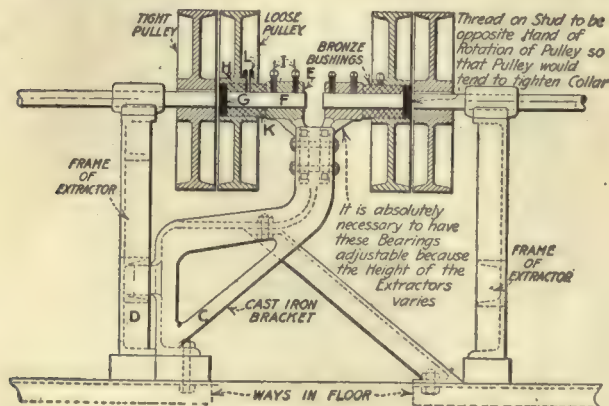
IMPROVED METHOD OF MOUNTING PULLEY
